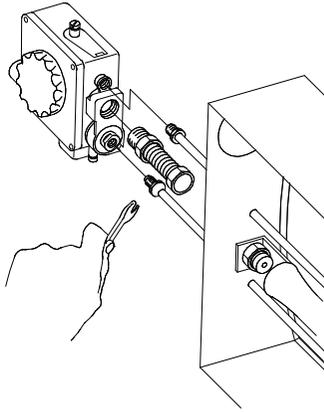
Removing the burner, pilot-flame pipe and thermocouple
